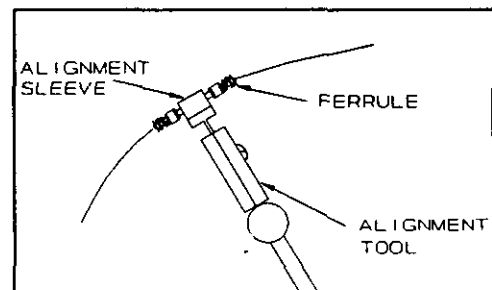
C1-1. Insert ferrules into alignment sleeve.
